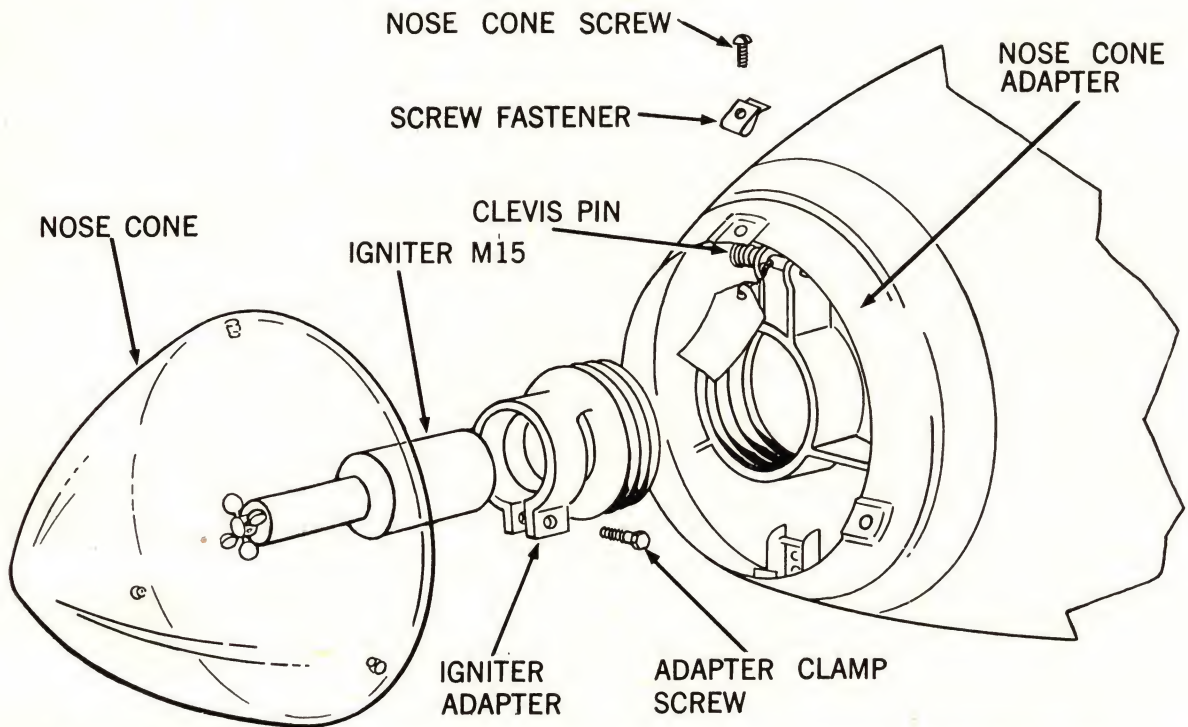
Nose Cone Assembly With Igniter M15 and Igniter Adapter, Exploded View.
